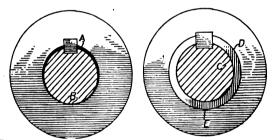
Pulley too large for Shaft. Fig. 2-Properly Bushed Hub.
